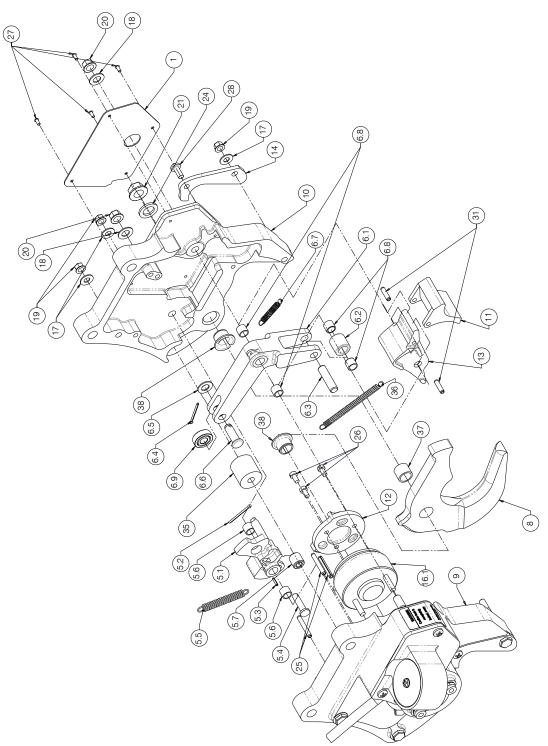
Cargo Hook Parts (528-044-10 & 528-044-11 shown)
